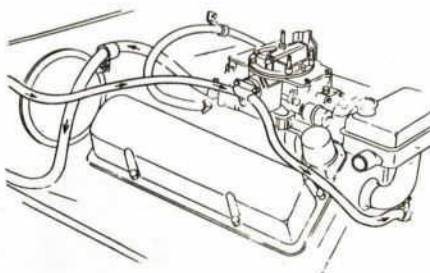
352 And 390 C.I.D. Engine Heater Hose Routing
